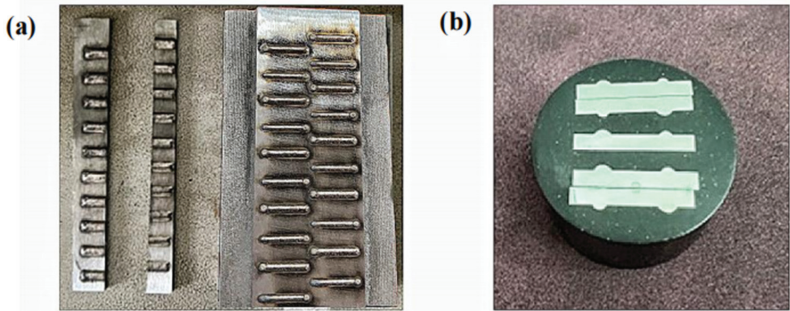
(a) Macrographs of the surfaces of single- and double-pass deposited layers using direct laser deposition, as well as a long-cut specimen. (b) Macroscopic view of the cross-section of a long specimen after wire cutting and mounting.
